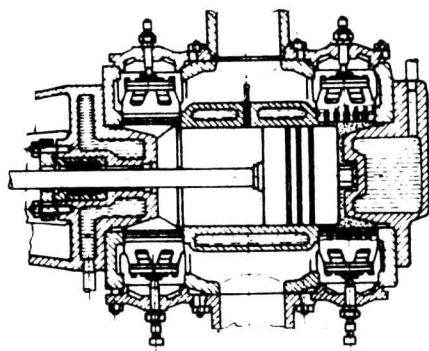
Clearance of a reciprocating compressor
